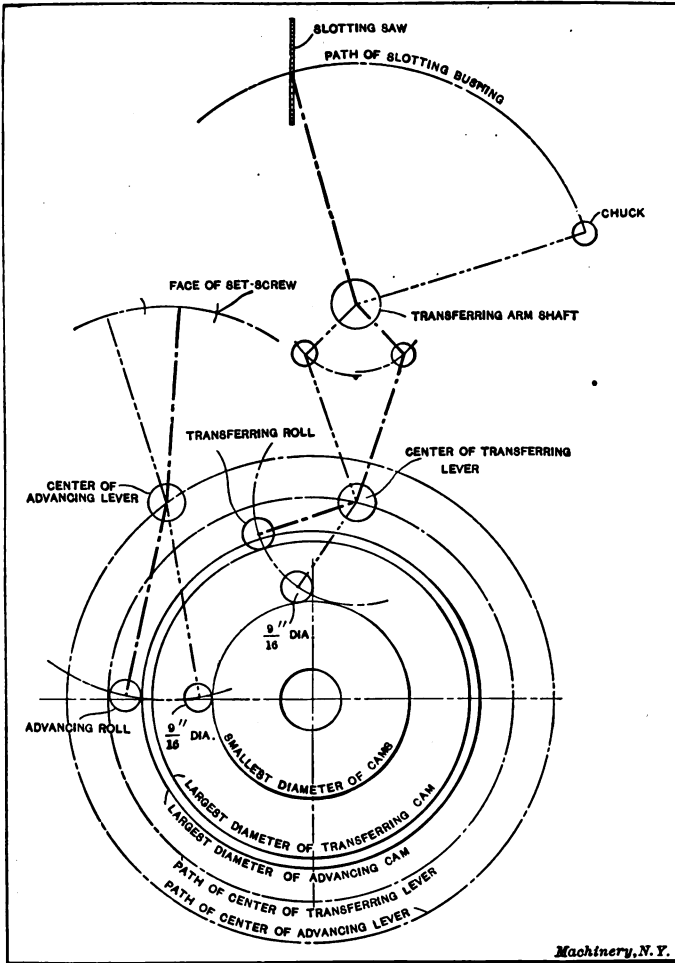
Diagram used in laying out Transferring and Advancing Cams for the No. 0 Brown & Sharpe Automatic Screw Machine
